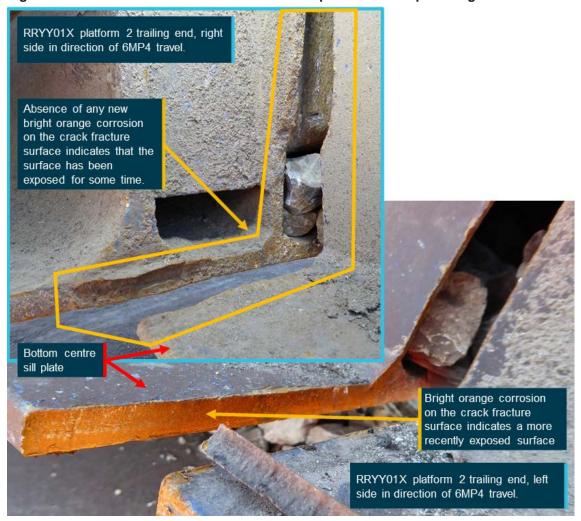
Underframe crack fracture surfaces in platform 2 of 5-pack wagon RRYY01X
